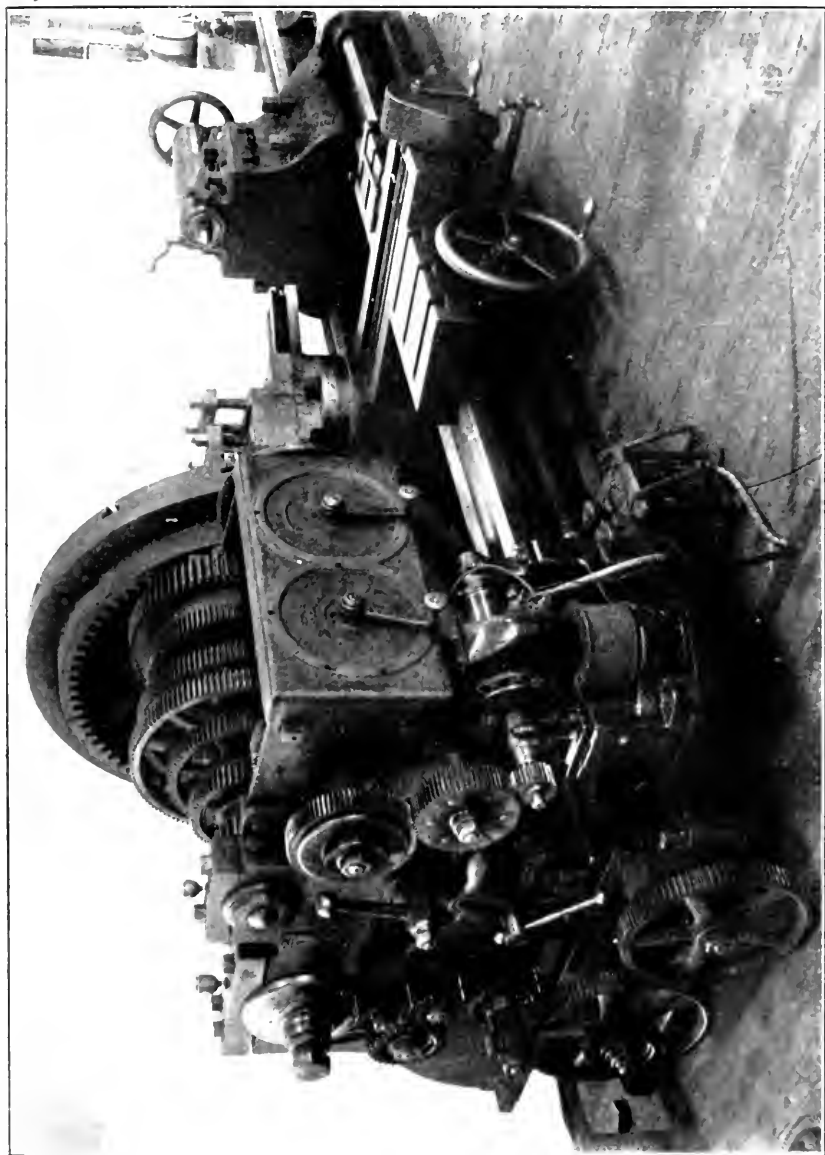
One of the first motor-driven engine lathes equipped by the Crocker-Wheeler Company for their own use.
